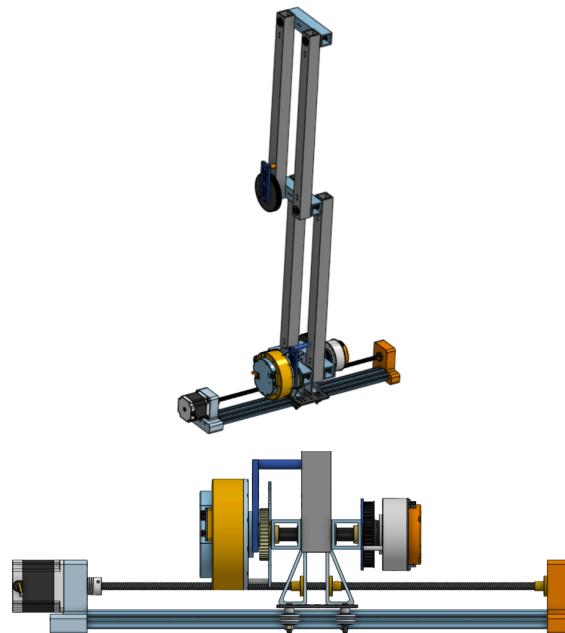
Full and section views of robot arm CAD. Linear slide actuates horizontal translation and two revolute joints position end effector. The second revolute joint is driven via pulley to reduce required motor torque. A double parallelogram mechanism provides further mechanical advantage.
